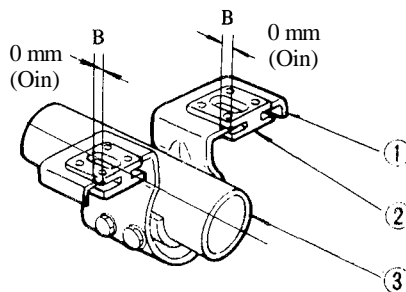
Standard dimension between column clamp and the top end of lower jacket tube
